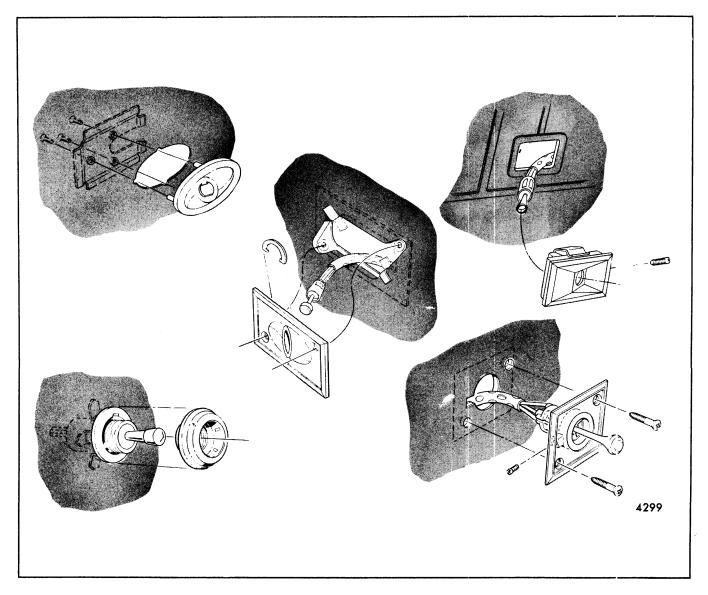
Typical Remote Mirror Cable and Escutcheon Attachment
